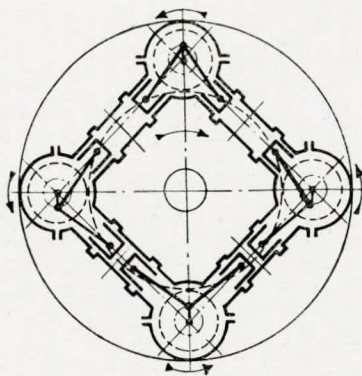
JUNKERS 24 CYLINDER OPPOSED-PISTON OIL ENGINE 1939
